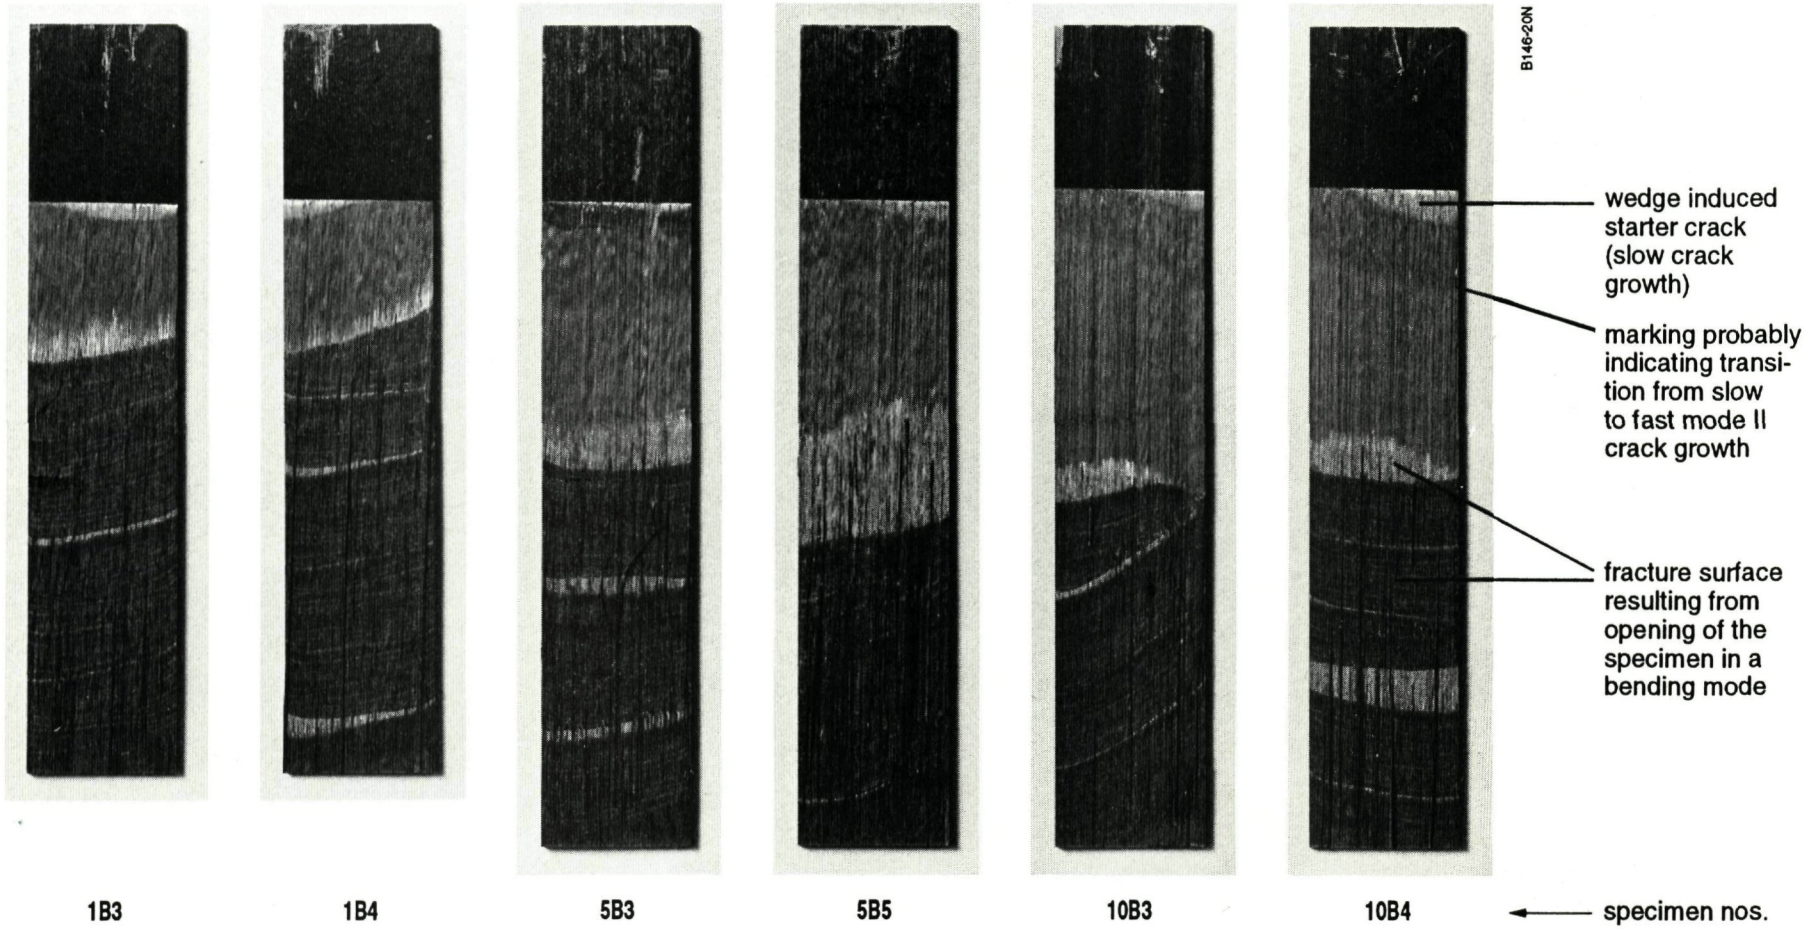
Typical fracture surfaces of ENF specimens (cooling rates 1, 5 and 10°C/min)
